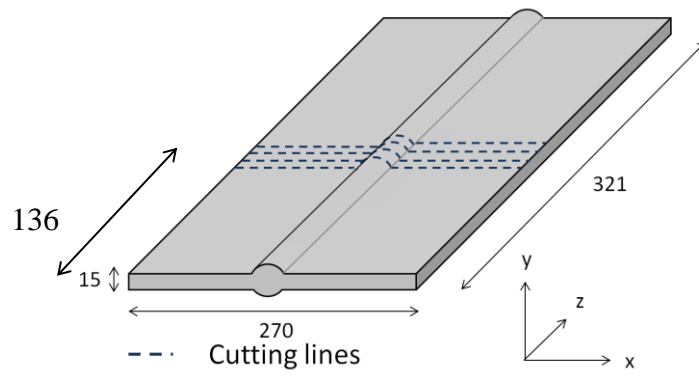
Double bead-on-plate dimensions (in mm) and cutting lines. Drawing is not to scale.
